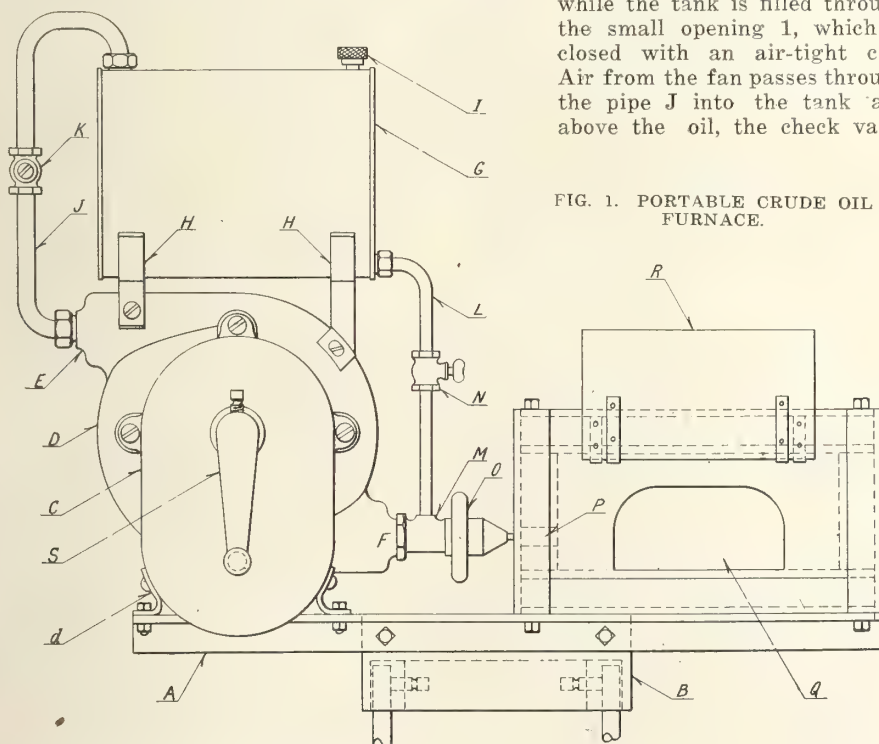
PORTABLE CRUDE OIL FURNACE.
